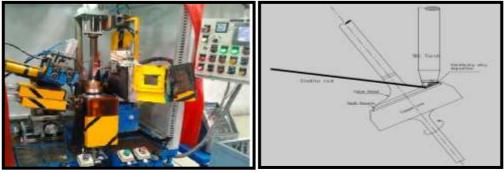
TIG welding machine and partial schematic drawing of seat hardfacing process
